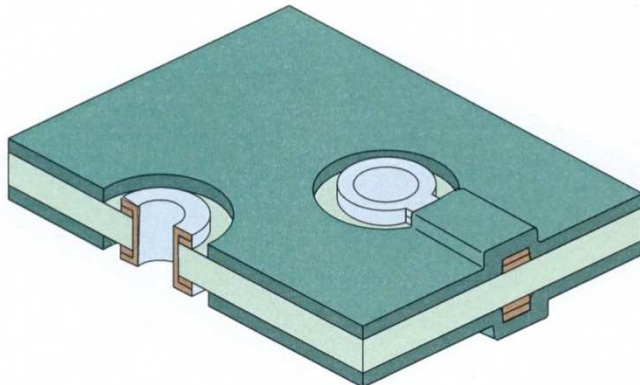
Solder coat. Solder (tin/lead) is applied to the exposed copper, and the excess solder is removed.
